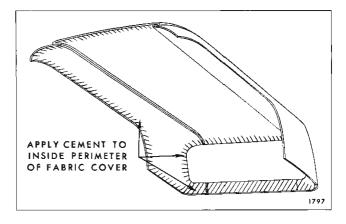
J2—Cementing of Fabric Roof Cover for Styles with Felt Pad
